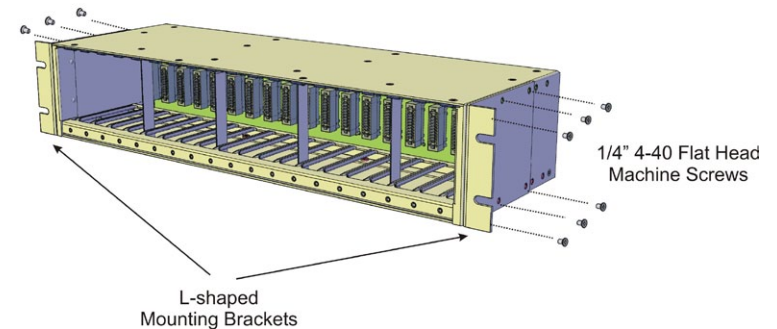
Installation of Mounting Brackets on Single Front-Loading Chassis
